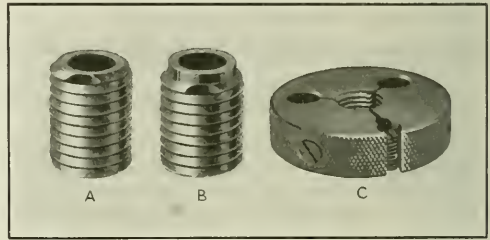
(A) and (B). Gage End Details showing Chip Groove and Pilot. (C) Adjustable Thread Templet Gage
